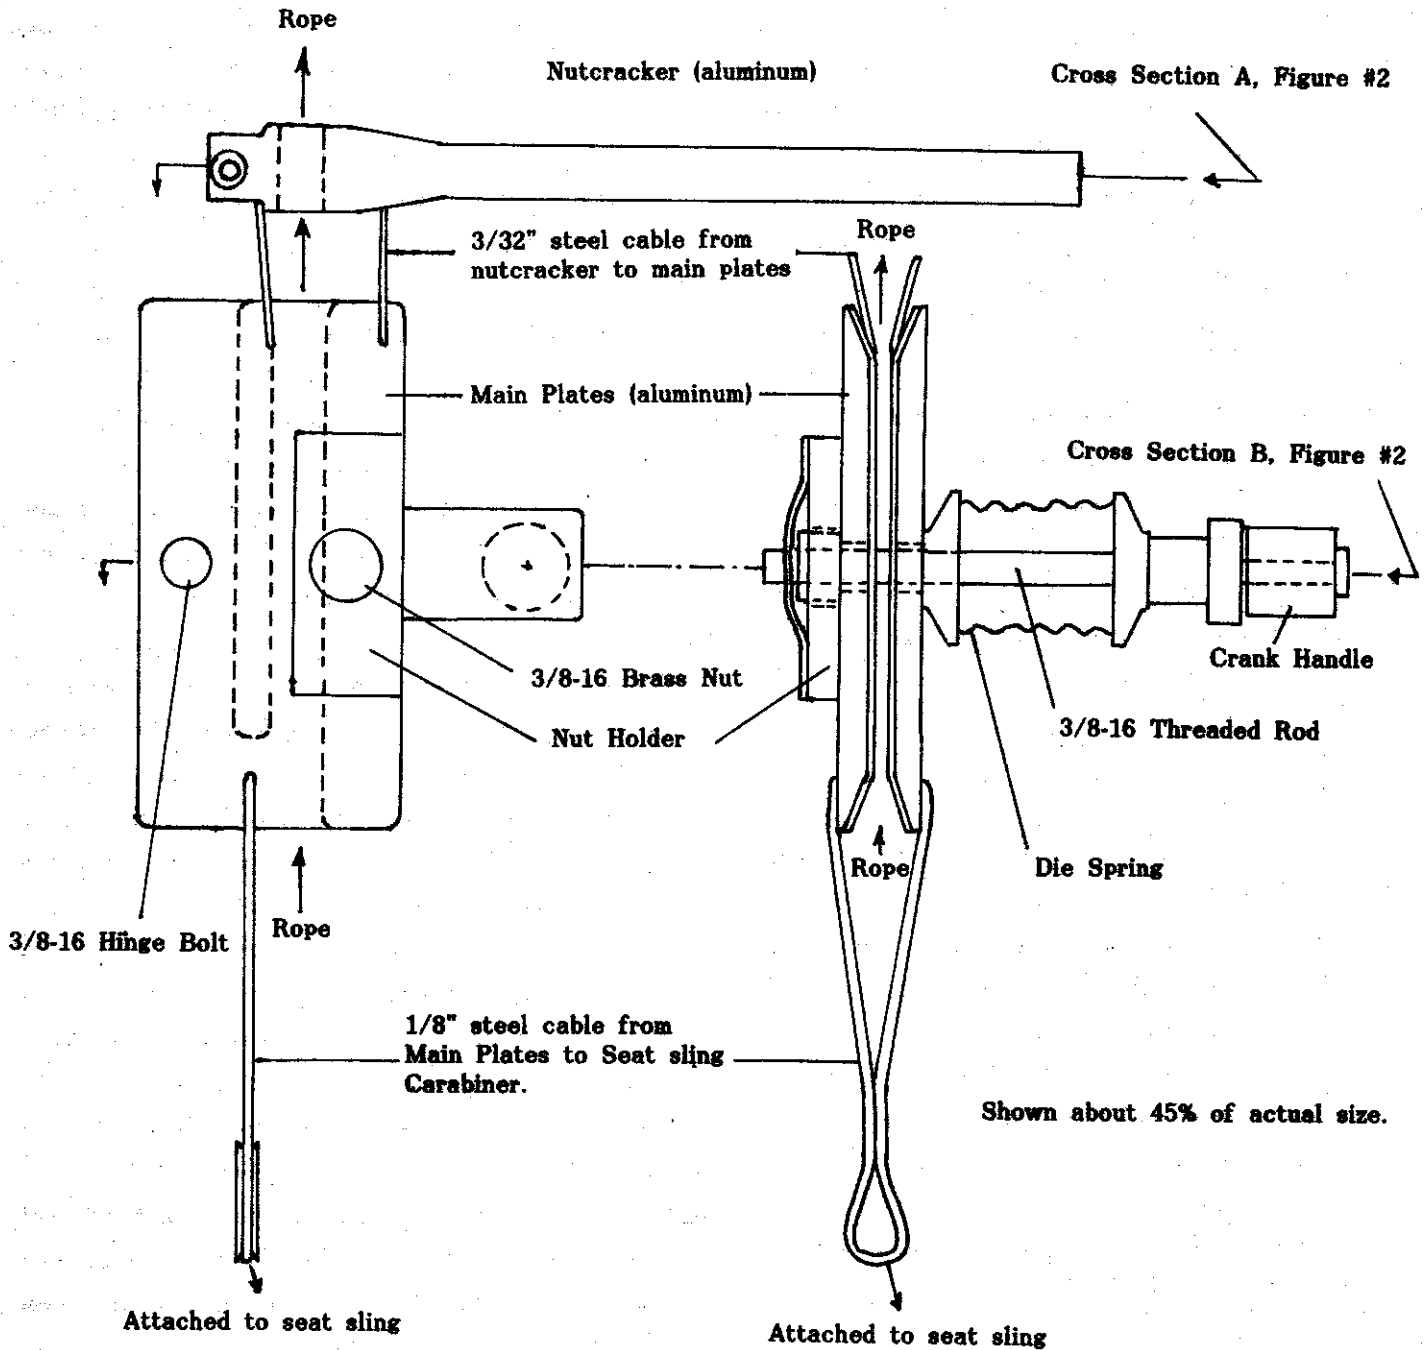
Side views of the Thor squeeze brake. On the left, the whole brake is viewed at right angles to the main plates. On the right, the brake is viewed parallel to the main plates with the nutcracker omitted. Most fastener detail has been omitted, including loops and ferrules on the steel cables, and the cords that prevent dropping the crank and die spring when the brake is open.
